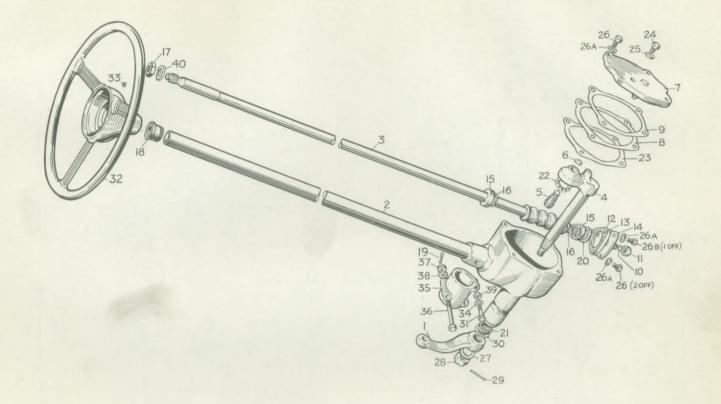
Exploded view of Burman L.3 steering gear details as fitted to the "Vanguard".
